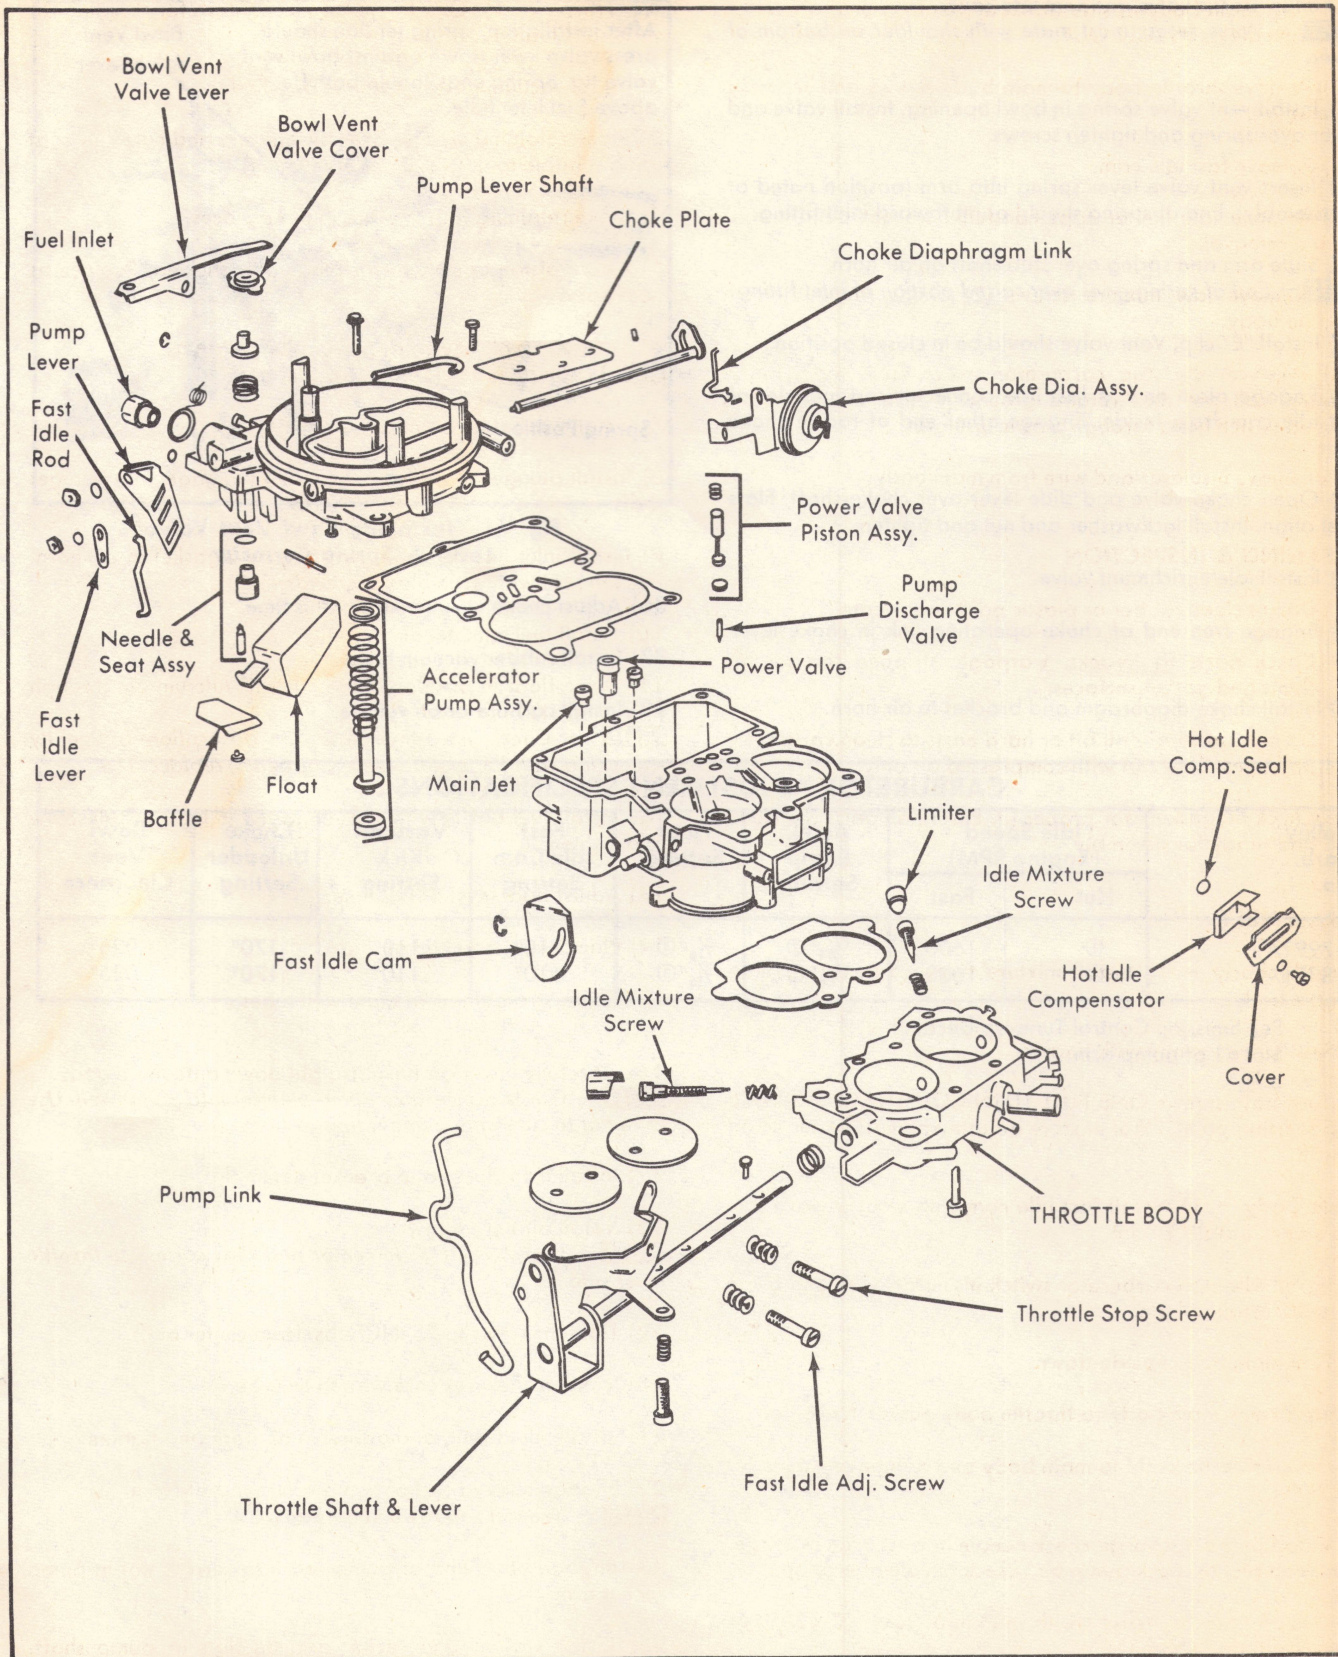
Exploded View Of Typical Holley 2245 2-Barrel Carburetor Showing Parts Relationships
